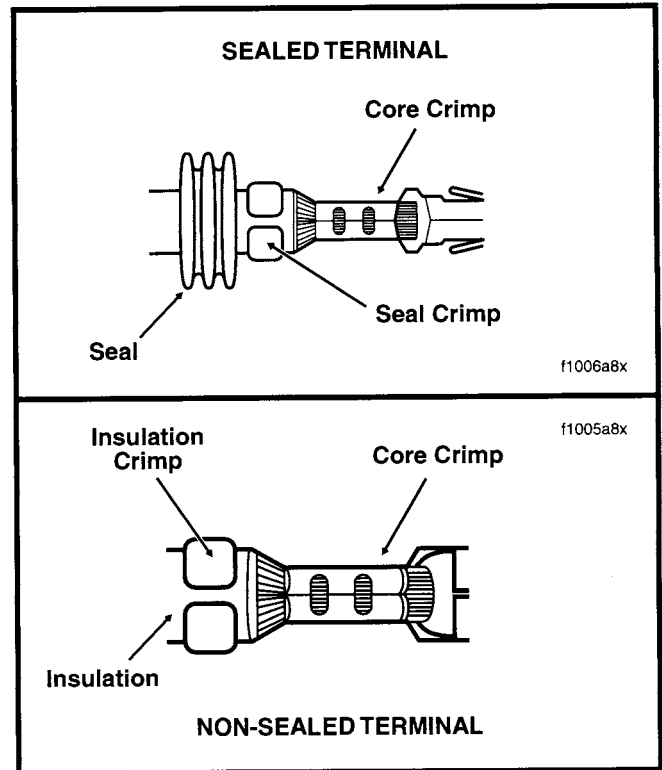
Inspect Core and Insulation/Seal Crimps
